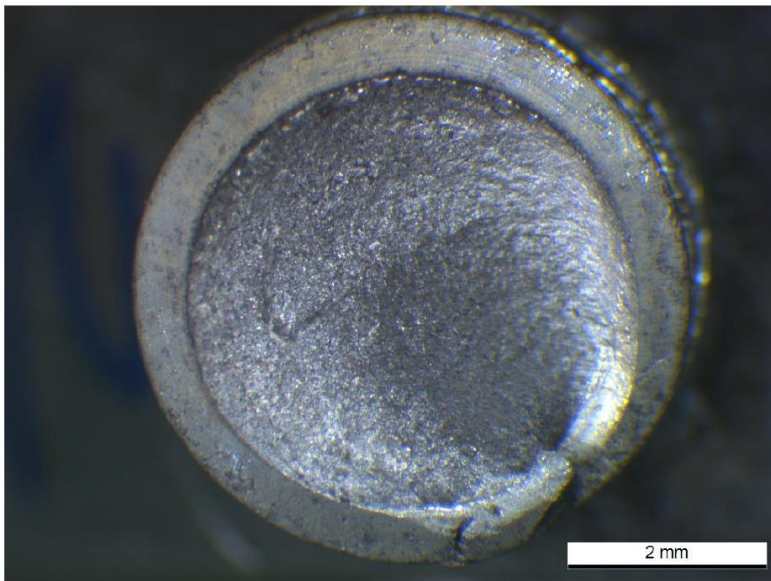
Aft left hand steering rod fracture surface in cleaned condition.
